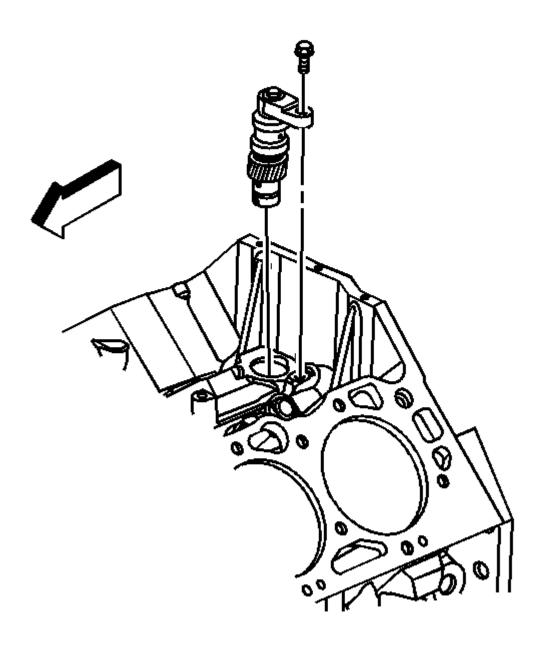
View Of Oil Pump Drive & Bolt Courtesy of GENERAL MOTORS CORP.
